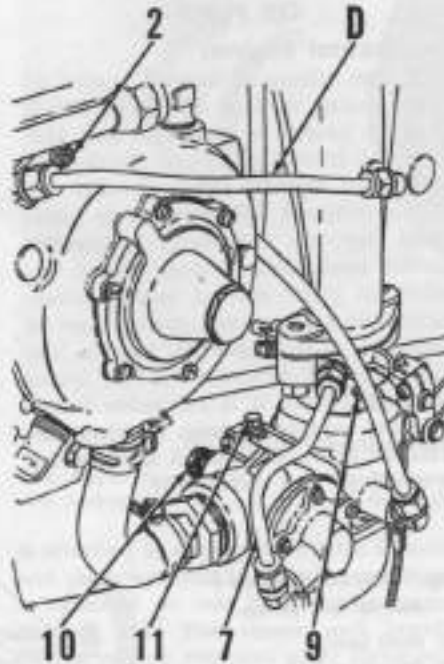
Model 44LP carburetor and regulator layout. Carburetor is Ensign model Xg, regulator is Ensign model W. Refer to legend under Fig. MH161.
